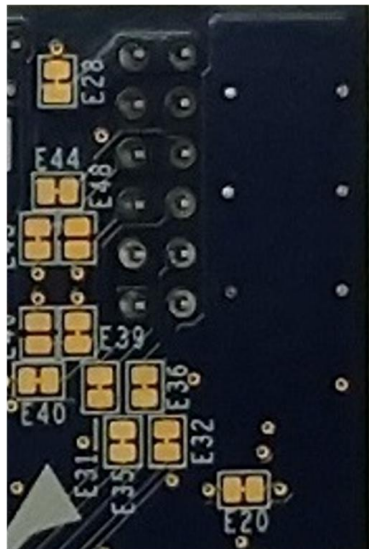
Pmod 2 Solder Bridge and Trace Cut Jumpers
